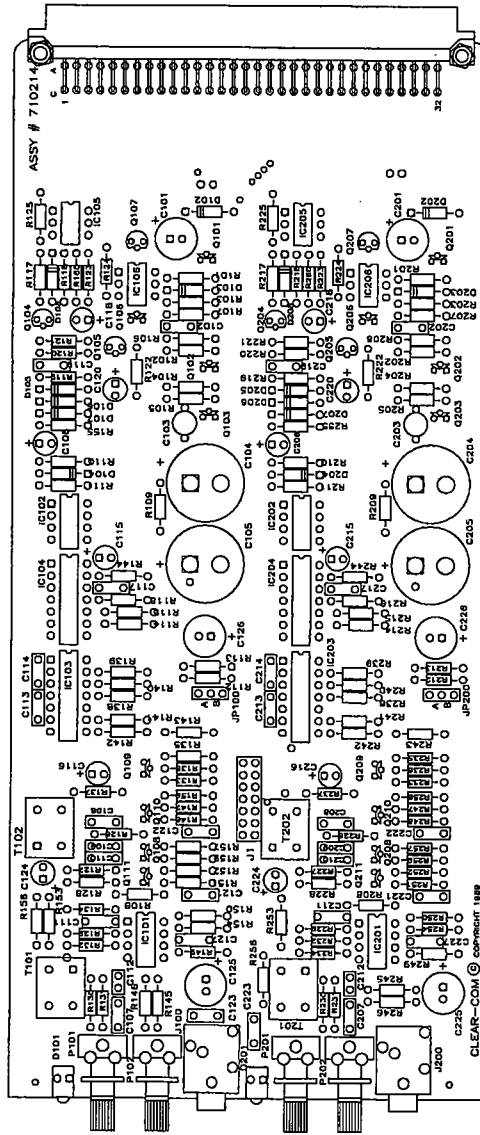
Assembly Drawing - CCI-22 Main PCB, Rev. D
